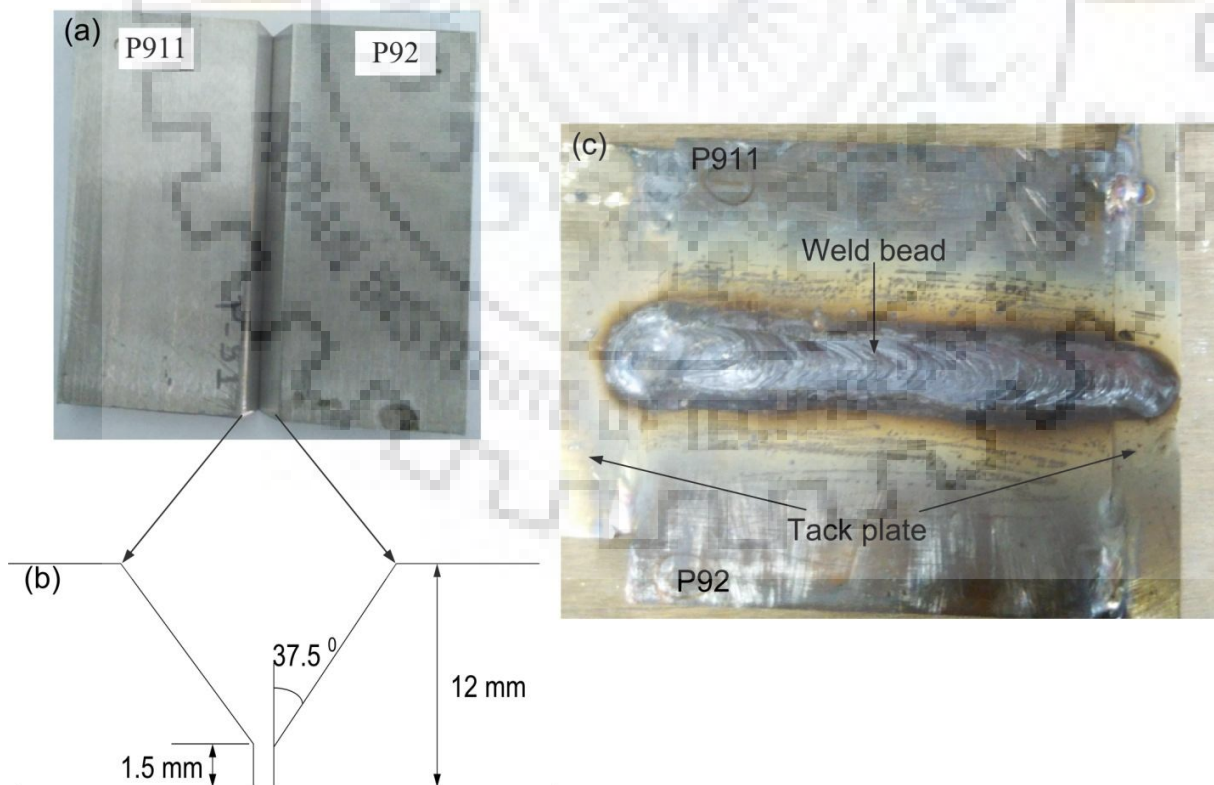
(a) Plates before welding, (b) weld groove design, (c) plate after completion of welding
